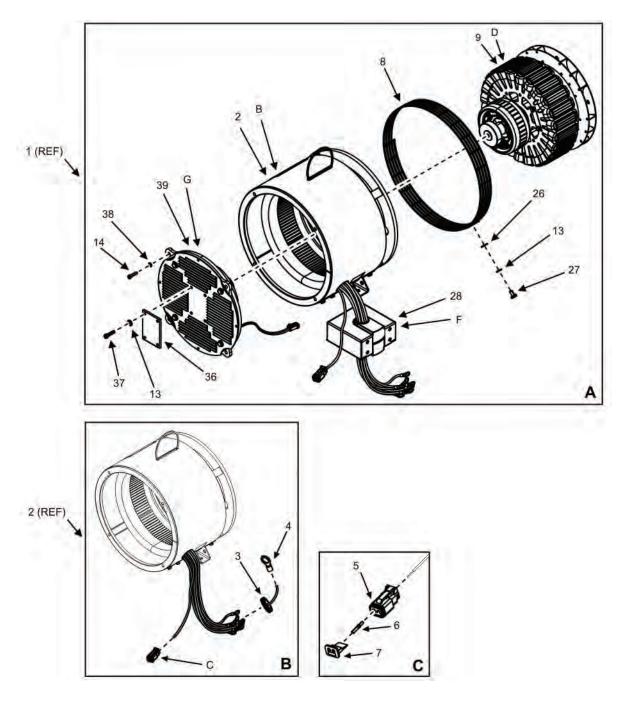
AC Generator Assembly, 400 Hz (Sheet 2 of 3).
